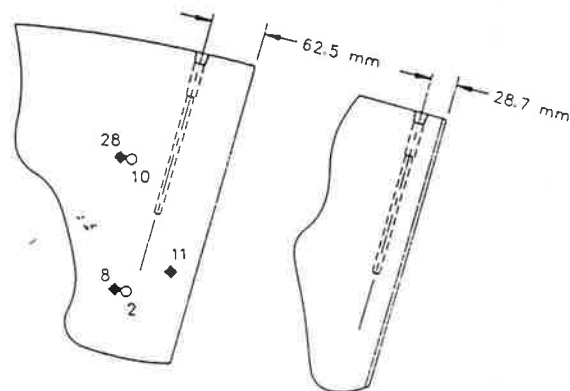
Shoe cross section showing thermocouple holes. All thermocouples were grounded in bottom of hole and epoxied in place.
